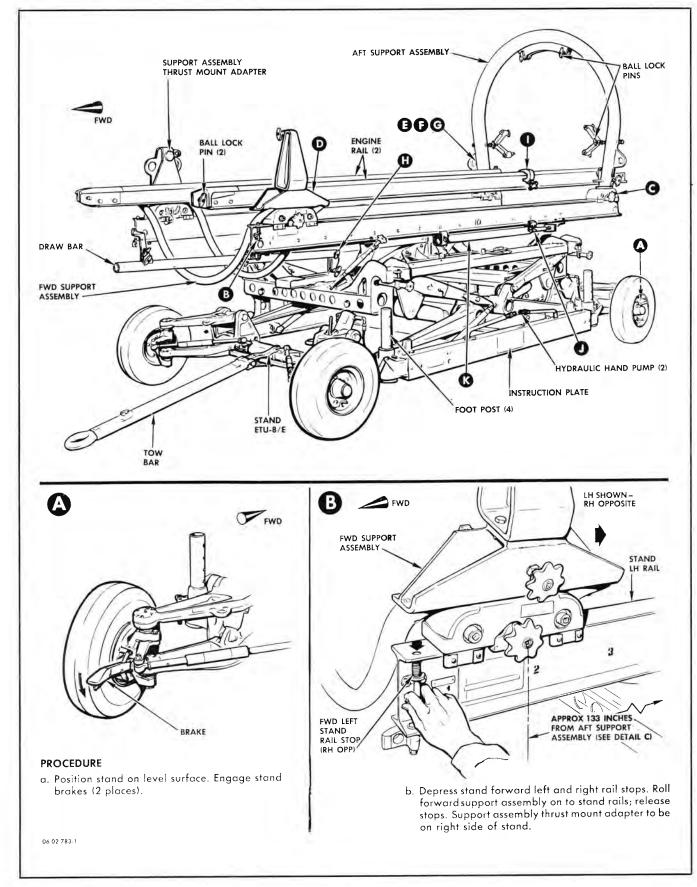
Engine Stand Preparation, Type USAF ETU-8/E Using Adapter Kit 8-96398 (Sheet 1 of 3)
